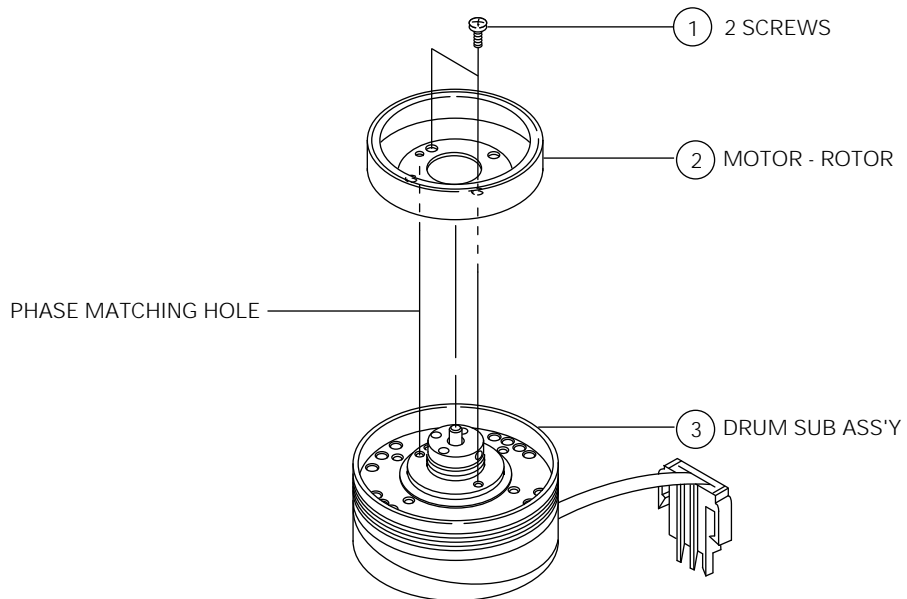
Assembly of Motor Rotor and Cylinder Sub Ass'y
